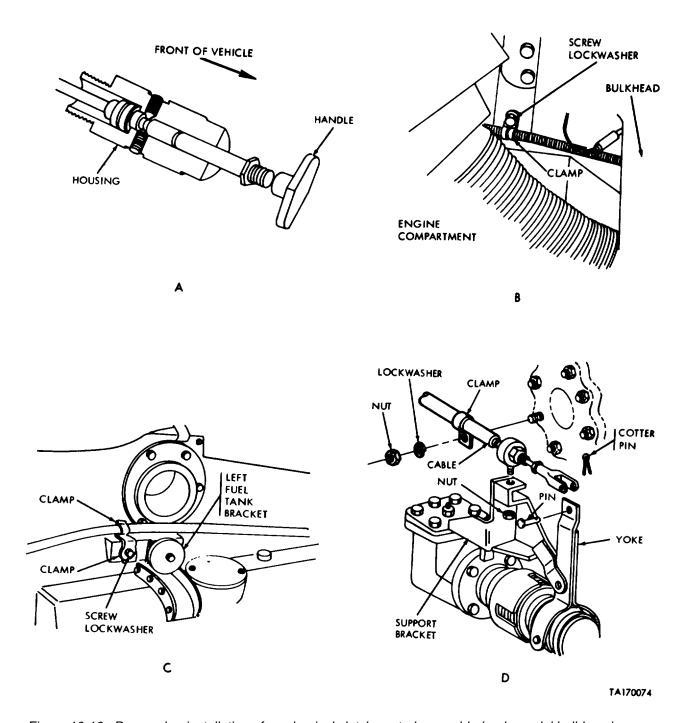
Removal or installation of mechanical clutch control assembly (early model bulldozer)
